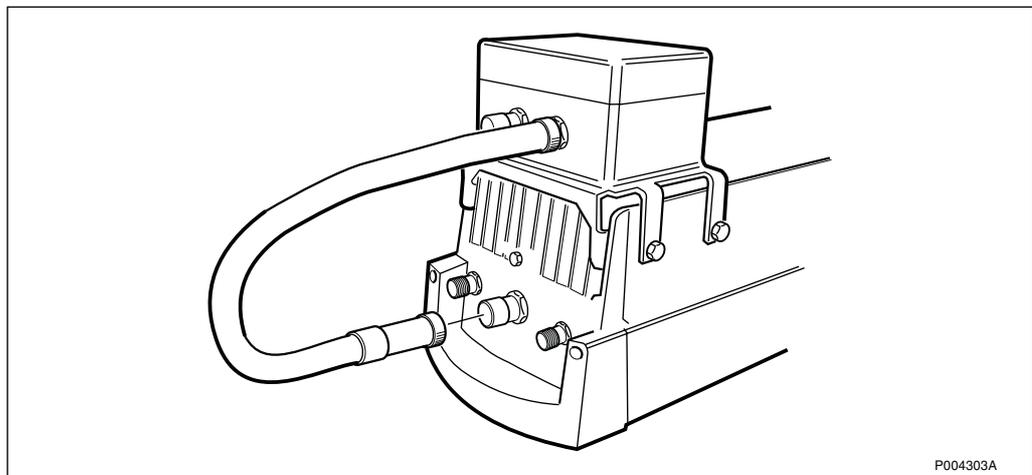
Tightening the screws and connecting the DC/Data jumper cable
